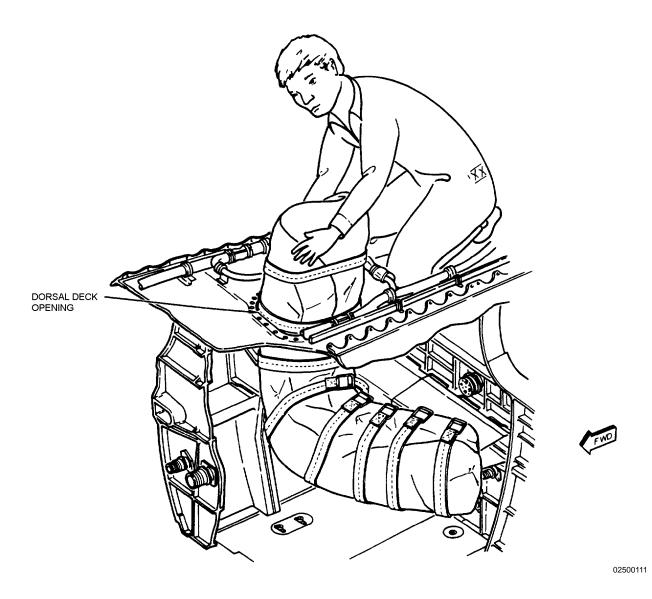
Removal - No. 3 Fuel Tank Folding (Sheet 11)
